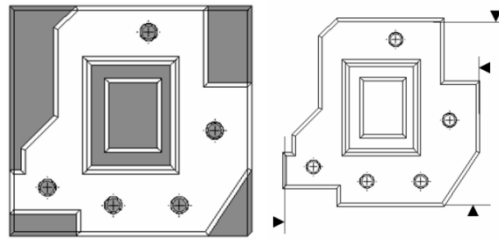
Workpiece material to be removed, workpiece surfaces that are not machined are selected for positioning
